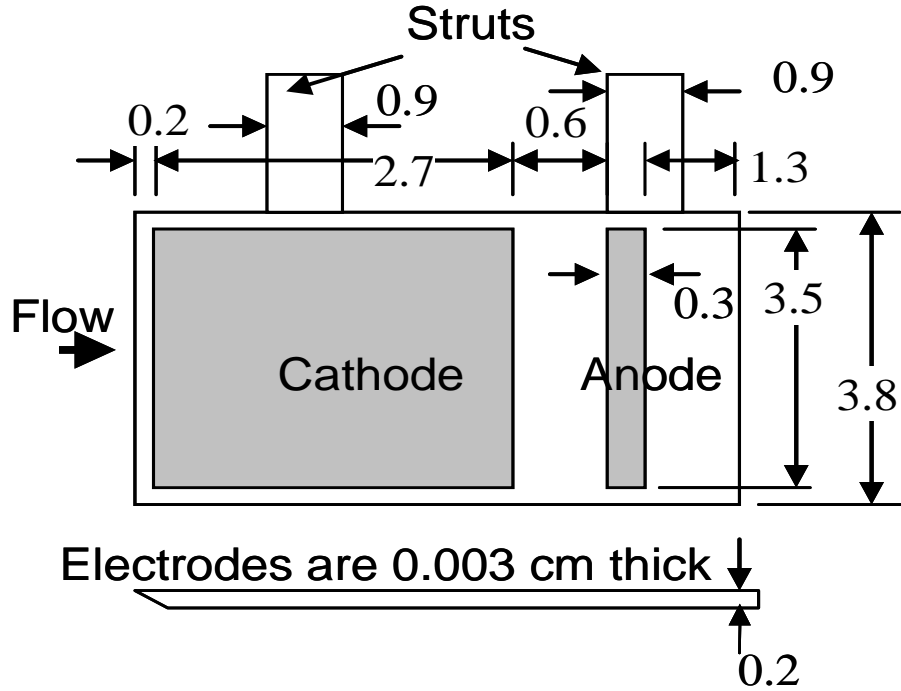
Dimensioned Drawing of the Flat Plate Model Used in Section 4.3 Work
